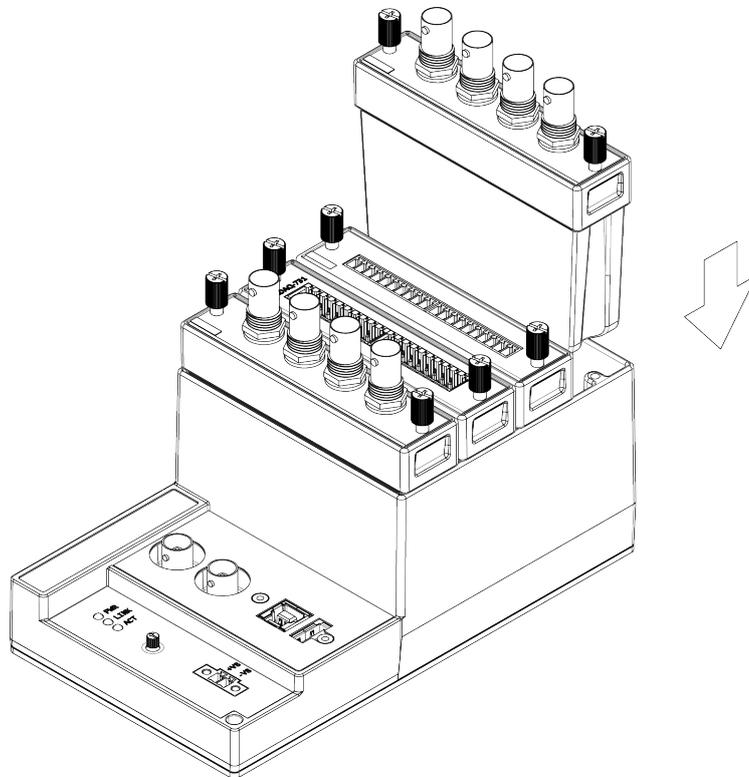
iDAQ Module Install into iDAQ Chassis
